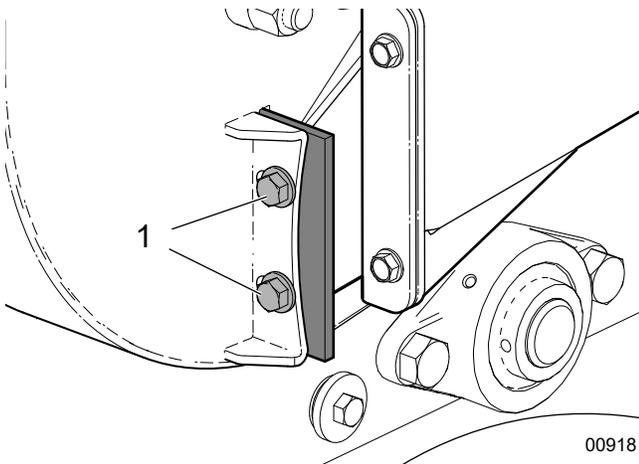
Adjusting Ledger Knife (BXM32 shown)
